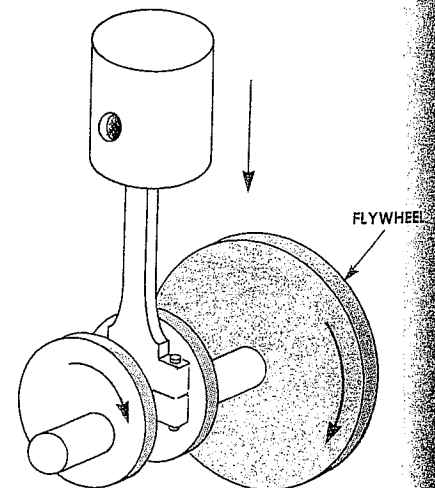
A heavy wheel called the flywheel is mounted with the crankshaft.
